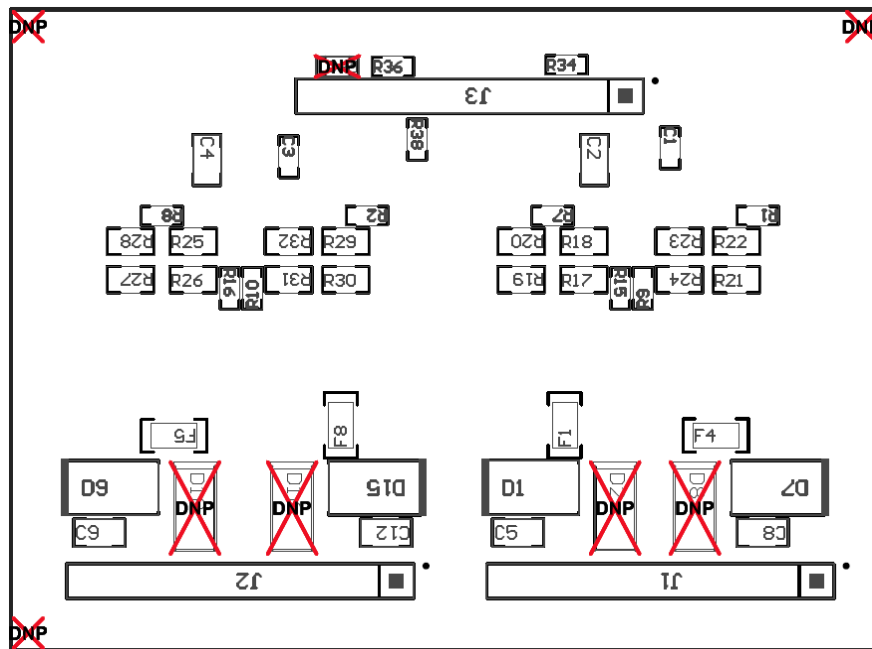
TPS23861EVM-613 (Daughterboard) Bottom Side Assembly
